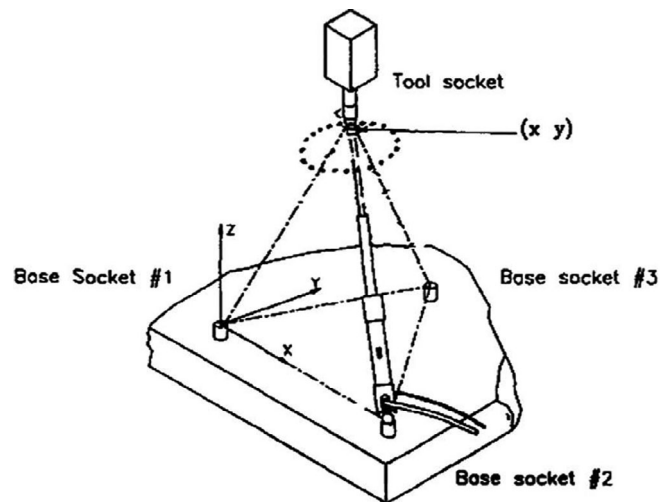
Experimental arrangement for thermal error measurement in machine tool spindle using ball bar (Reproduced with permission from Elsevier, License Number: 5161760437674) Ref. [116]
